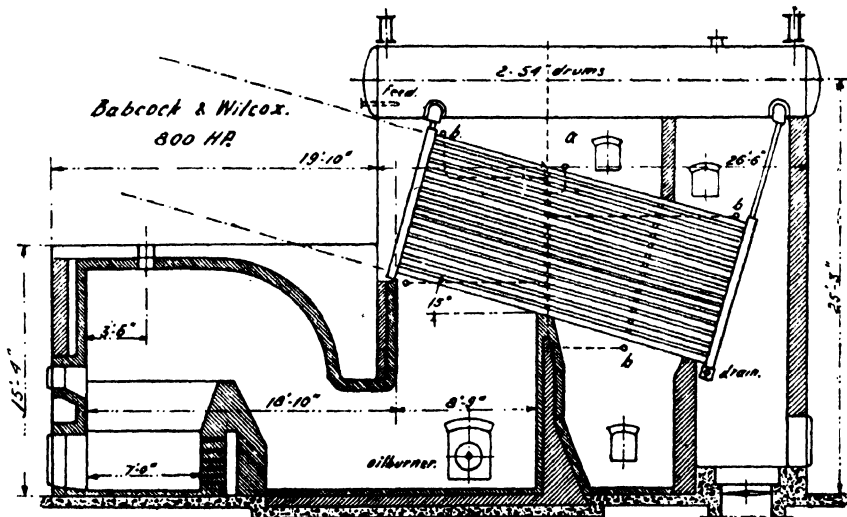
Design of Water Tube Boiler (Straight Tube Type).
